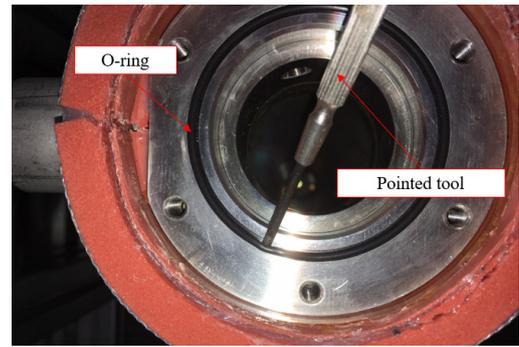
O-ring (face seal type) is hooked off with a pointed tool.
